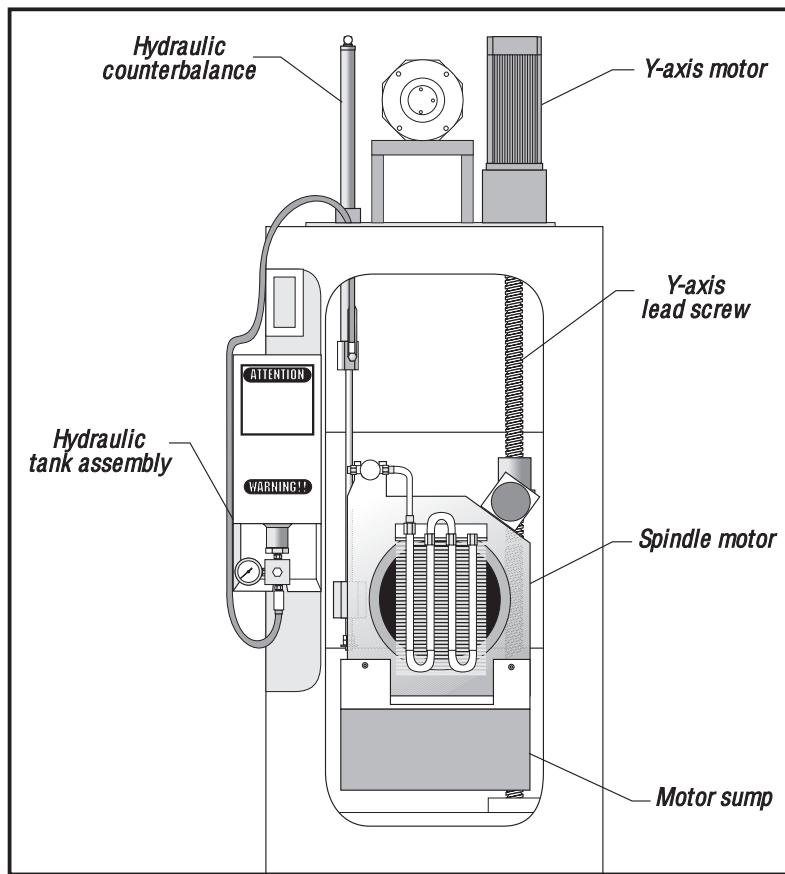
Y-axis lead screw and motor assembly (from rear).
